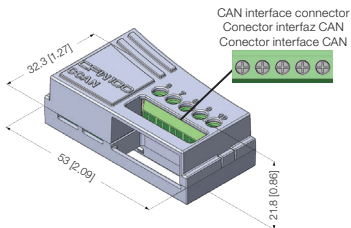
CFW100-CCAN dimensions in mm [in] and connectors location
